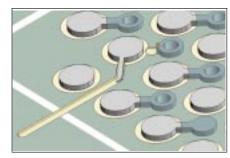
Remove BGA pad & mill shallow channel into solder mask surface.
